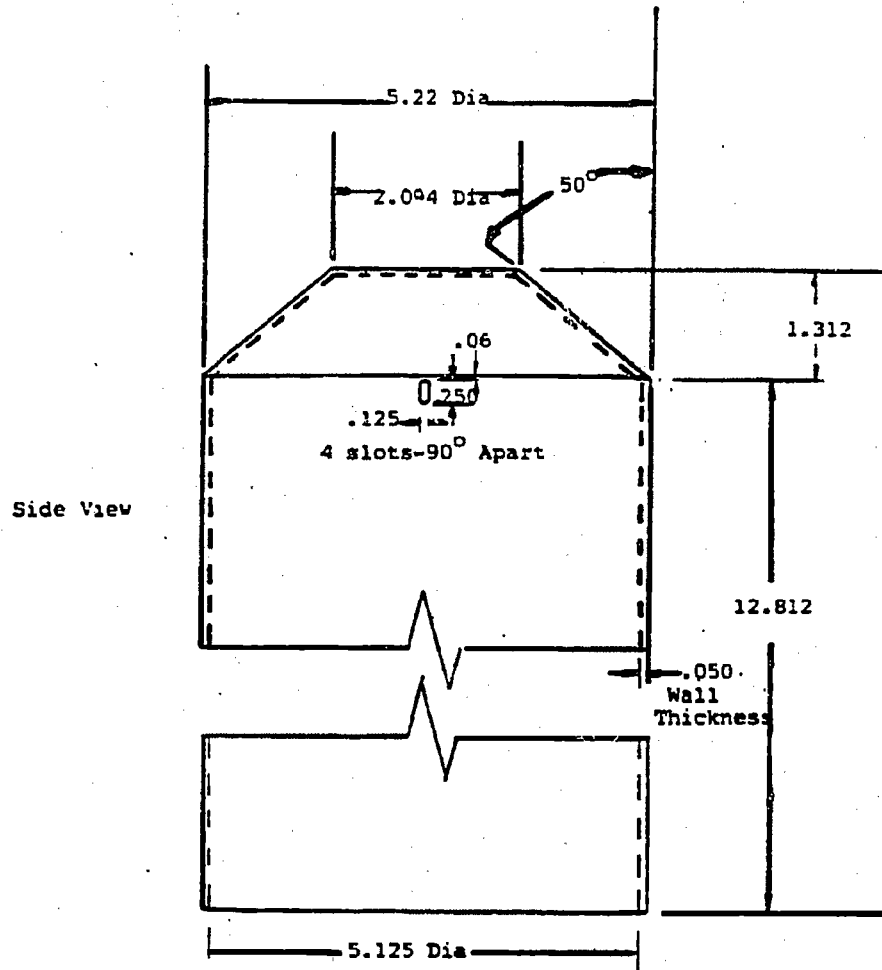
Side view of the inner Mu metal shield. The inner and outer shields are separated by 0.090 in. and are parallel with respect to the body of the CMA.
